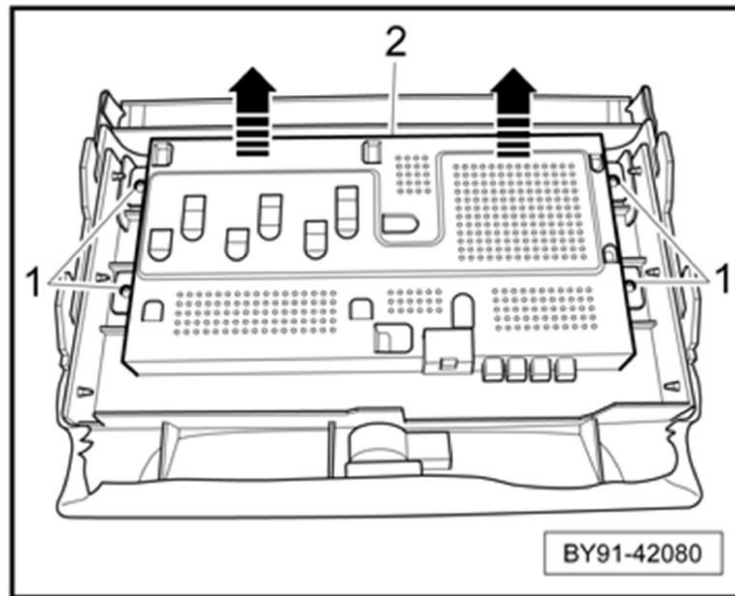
DVD Loader Unit Installation – Mounting to map pocket
